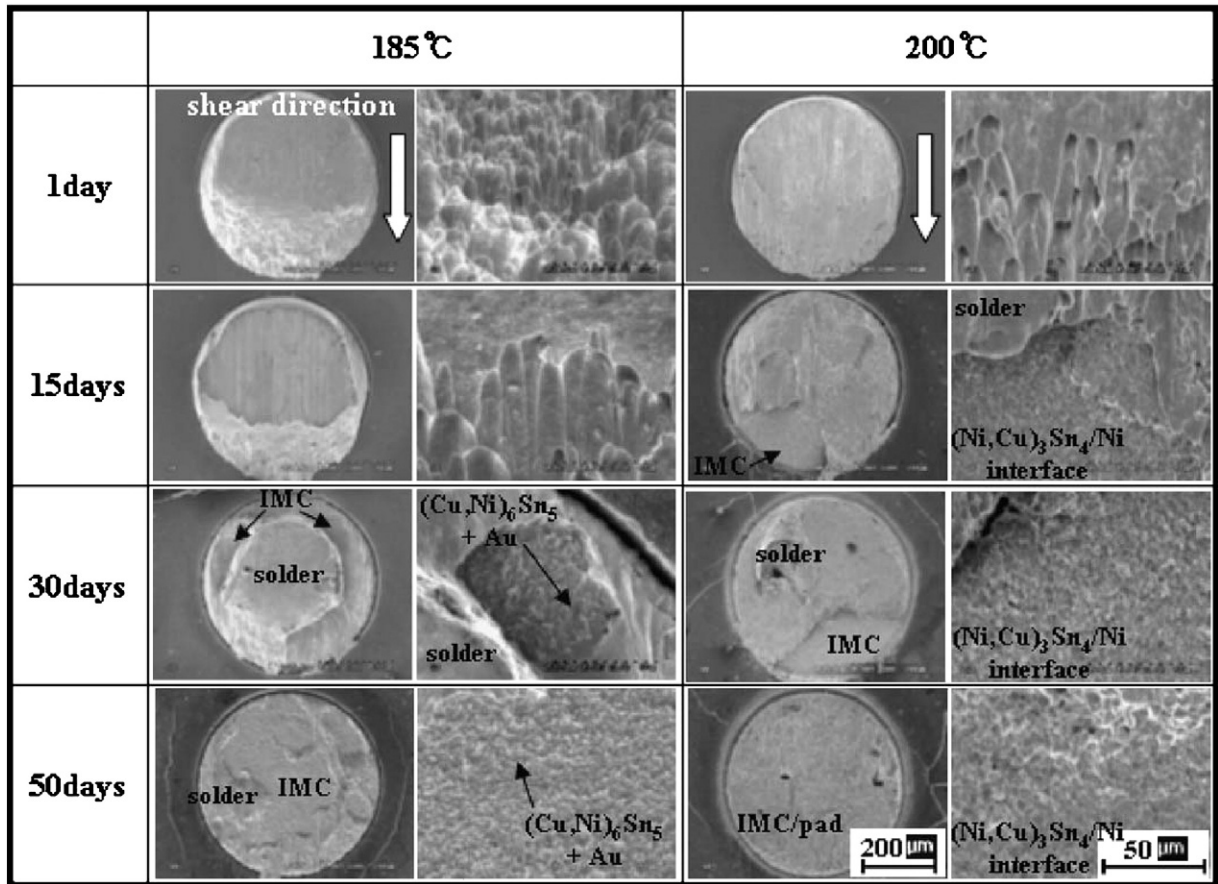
The fracture surfaces of Sn–0.7Cu/Ni solder joints aged under different conditions. [75].
